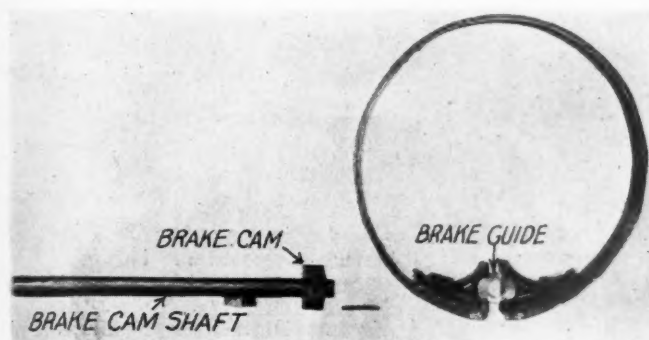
The Internal Brake is Easily Removed by Displacing Cotter Pin From Cam End of Cam Shaft and Slipping Off the Band.
